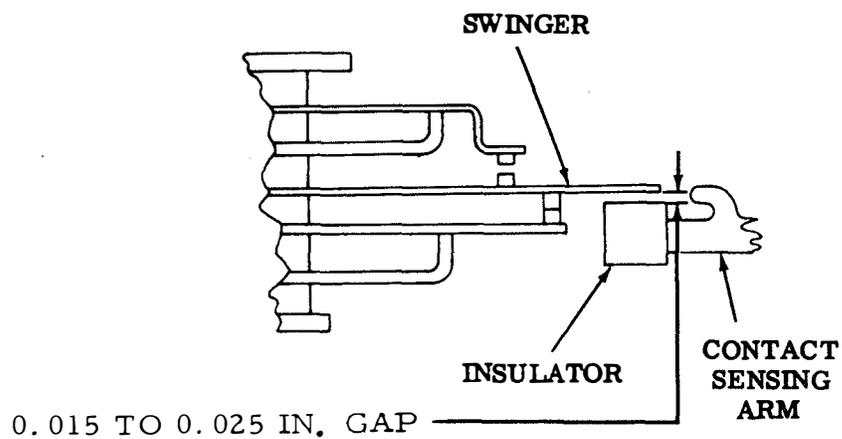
Contact Swinger - Sensing Arm Clearance
